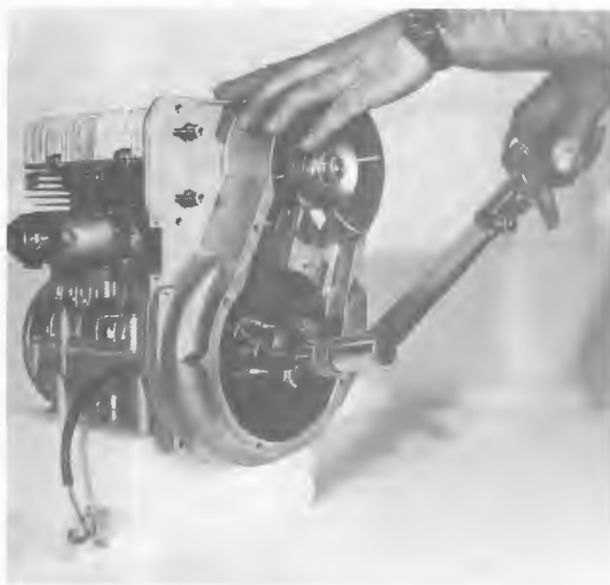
FLYWHEEL PULLER INSTALLED
